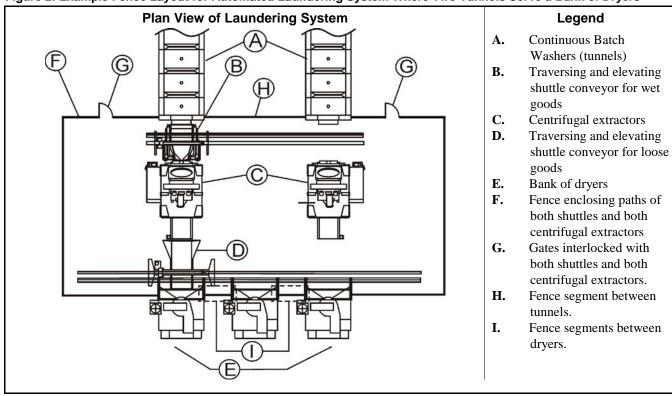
Example Fence Layout for Automated Laundering System Where Two Tunnels Serve a Bank of Dryers
